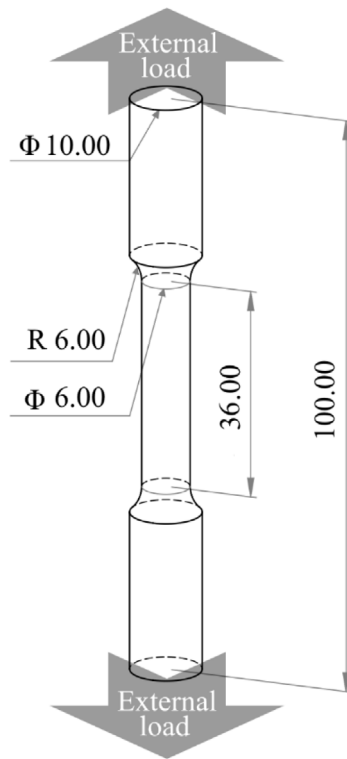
Schematic view of the tensile specimen (dimensions in mm).
